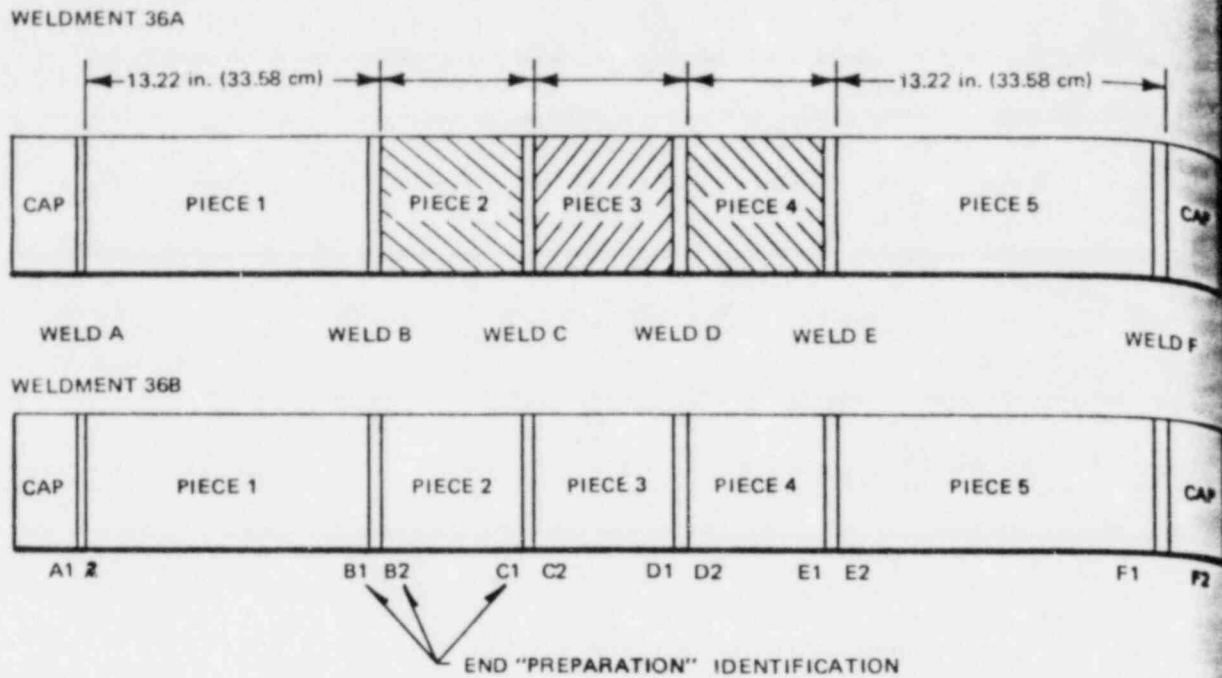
Test Weldments for Third Full-Size Pipe Bend Test in CL-4 Test Facility
